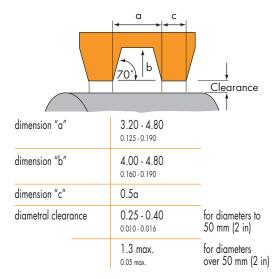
Annular grooves. Suggested dimensions (mm, in.).
